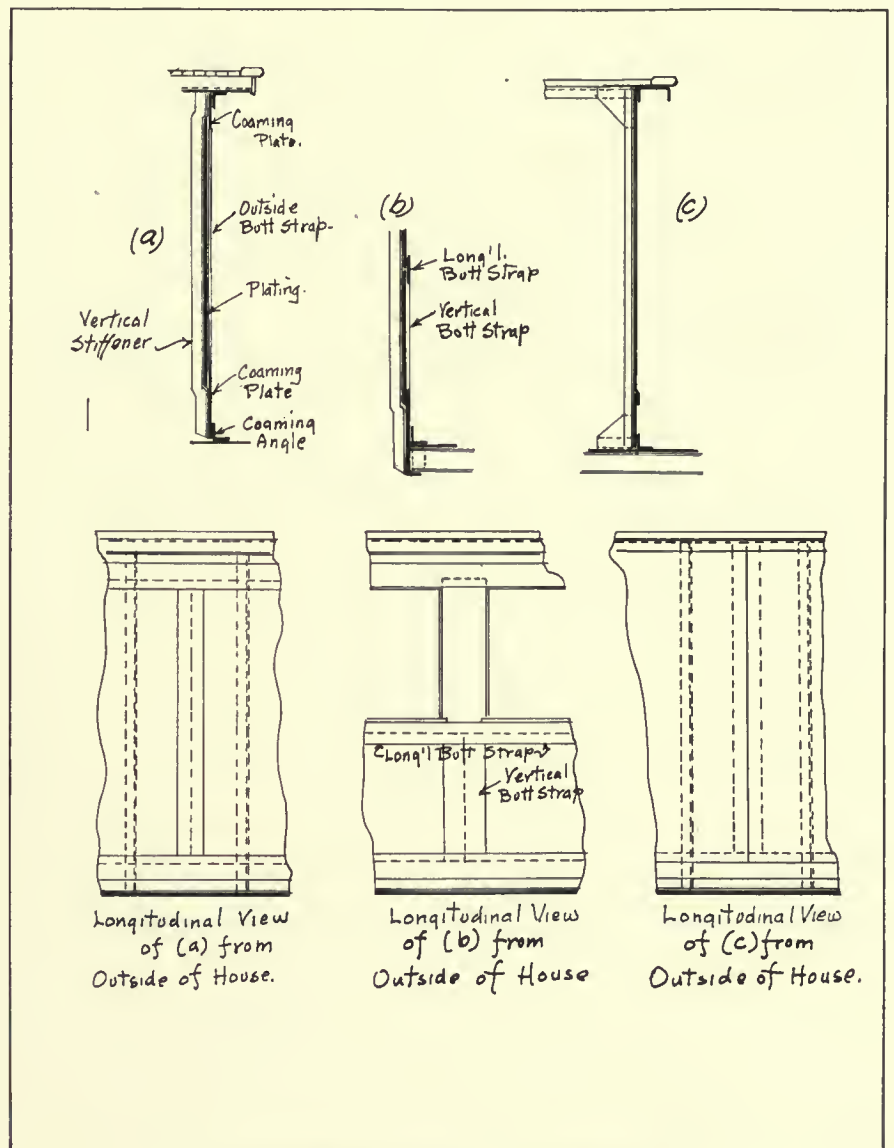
CONSTRUCTION DETAILS OF STEEL HOUSES
